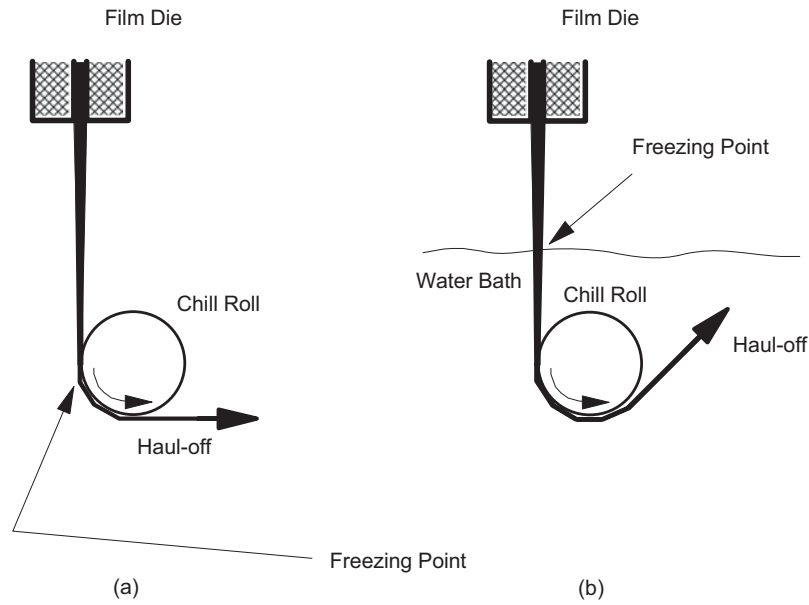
(a) Sectional view of chill-roll casting. (b) Sectional view of water bath casting.
